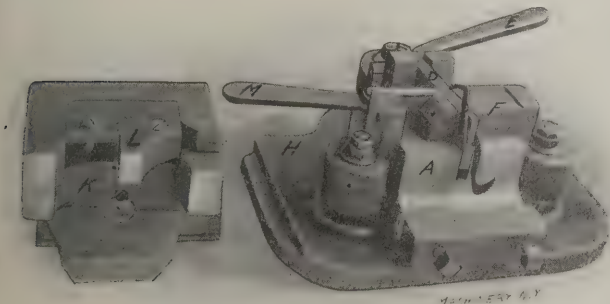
Bending Attachment with Removable Die. Operation Completed.
